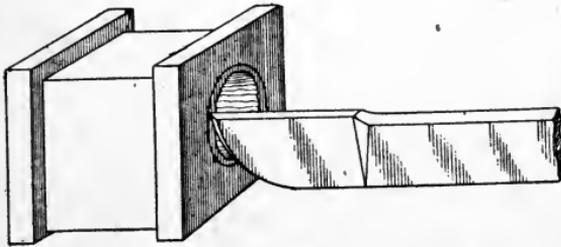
Use of Lathe Tool in Centering Piece to Be Bored
